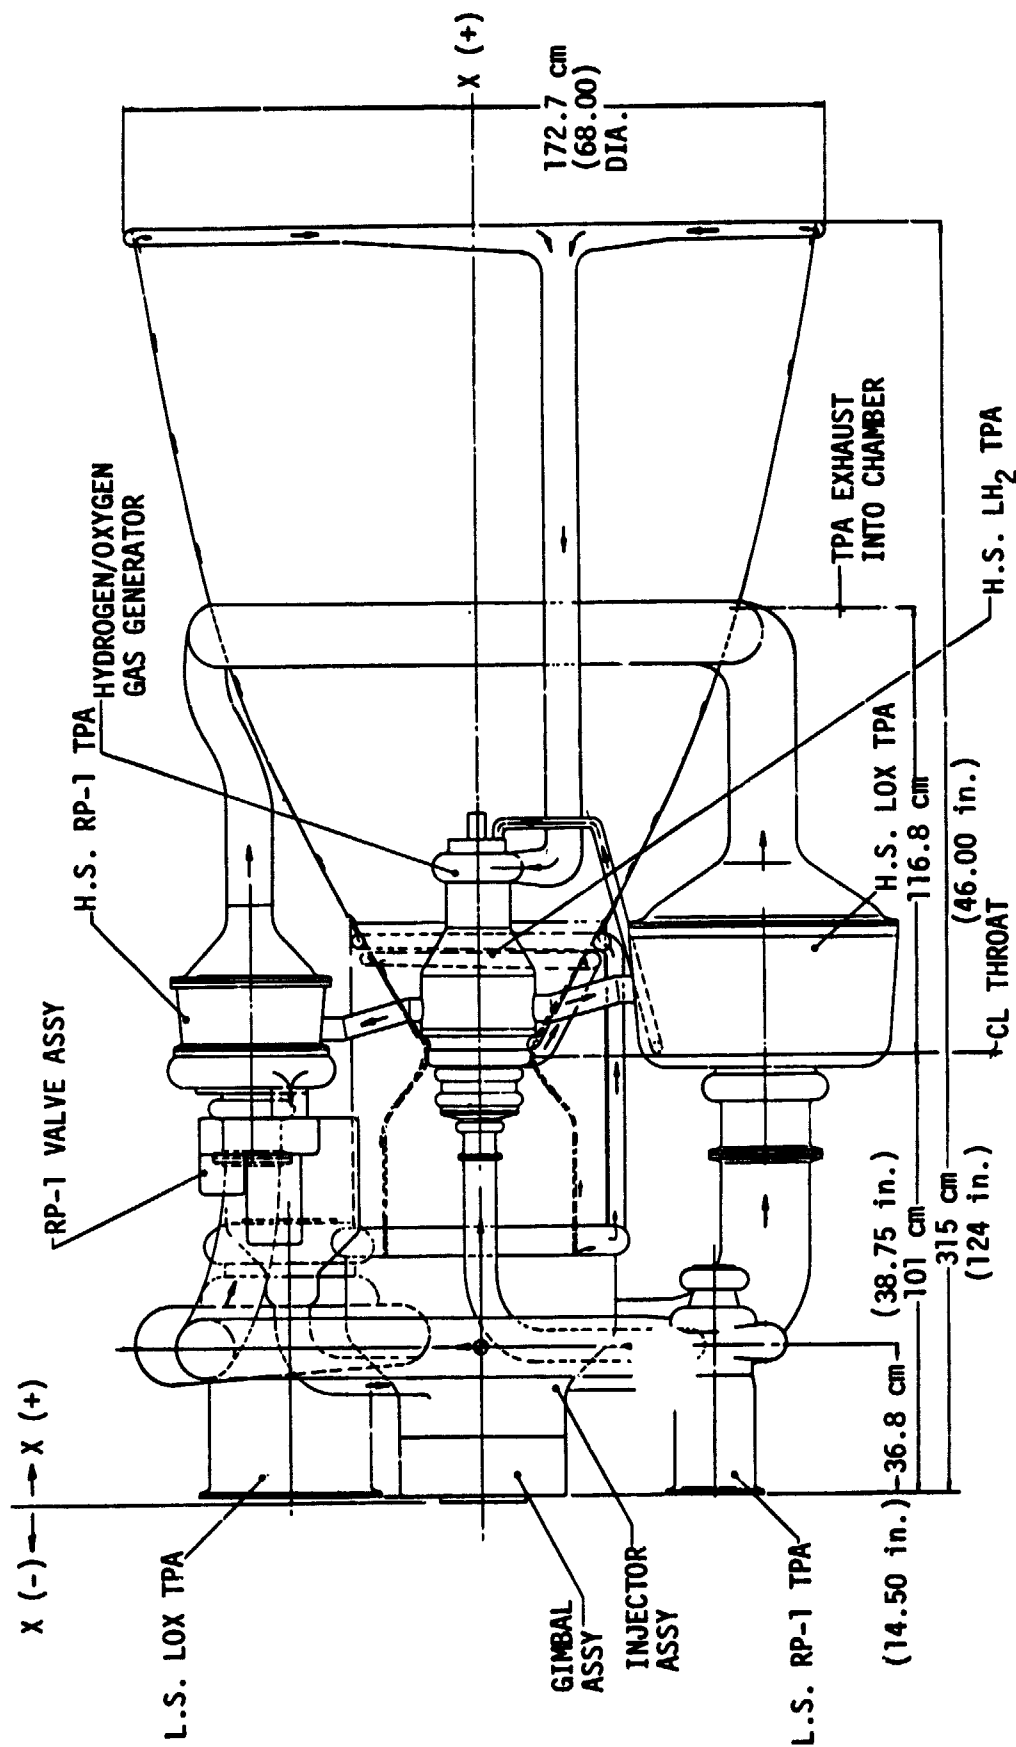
Mode 1 Hydrogen Cooled, Gas Generator Cycle Engine Assembly (Side View)
